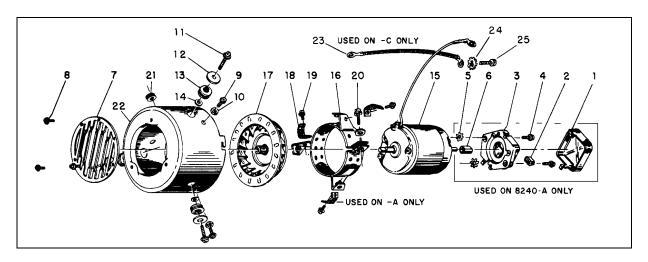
Ventilating Air Blower, 8240-Series Heaters.
